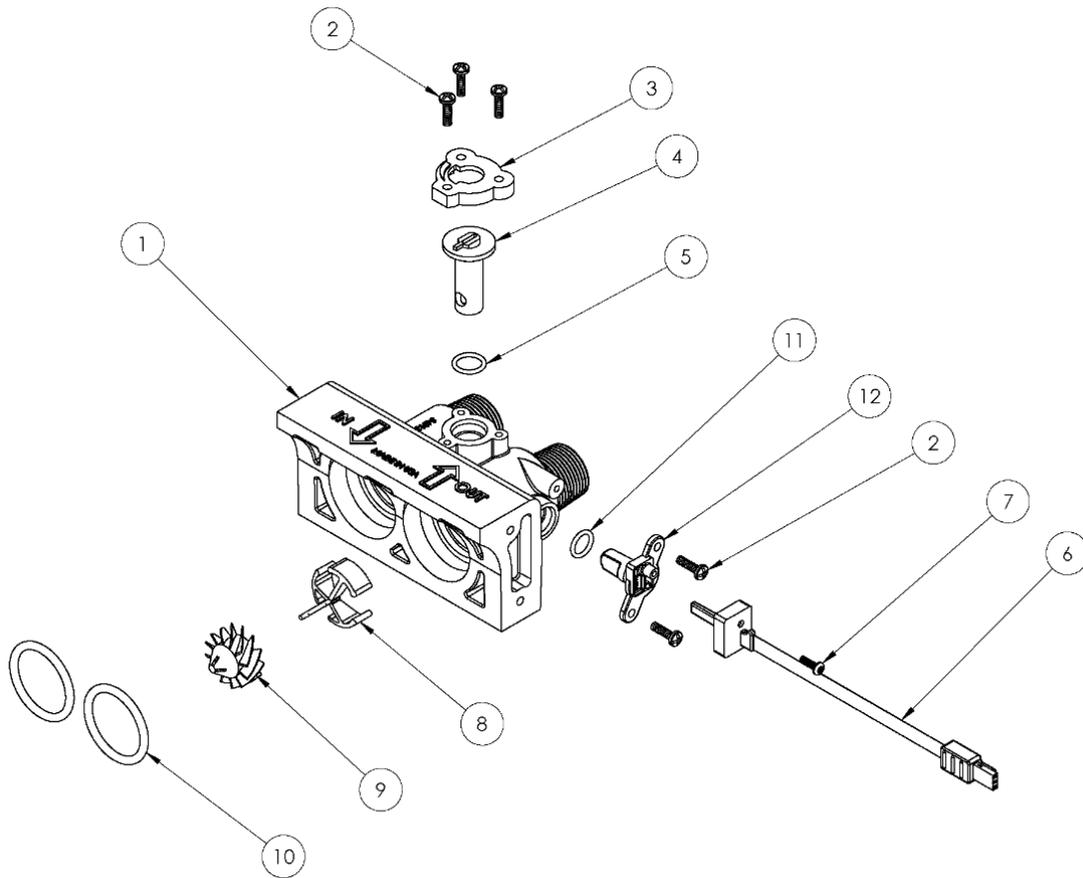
Optional 3/4-inch (19-mm) I/O Adapter Assembly with Blending Valve
